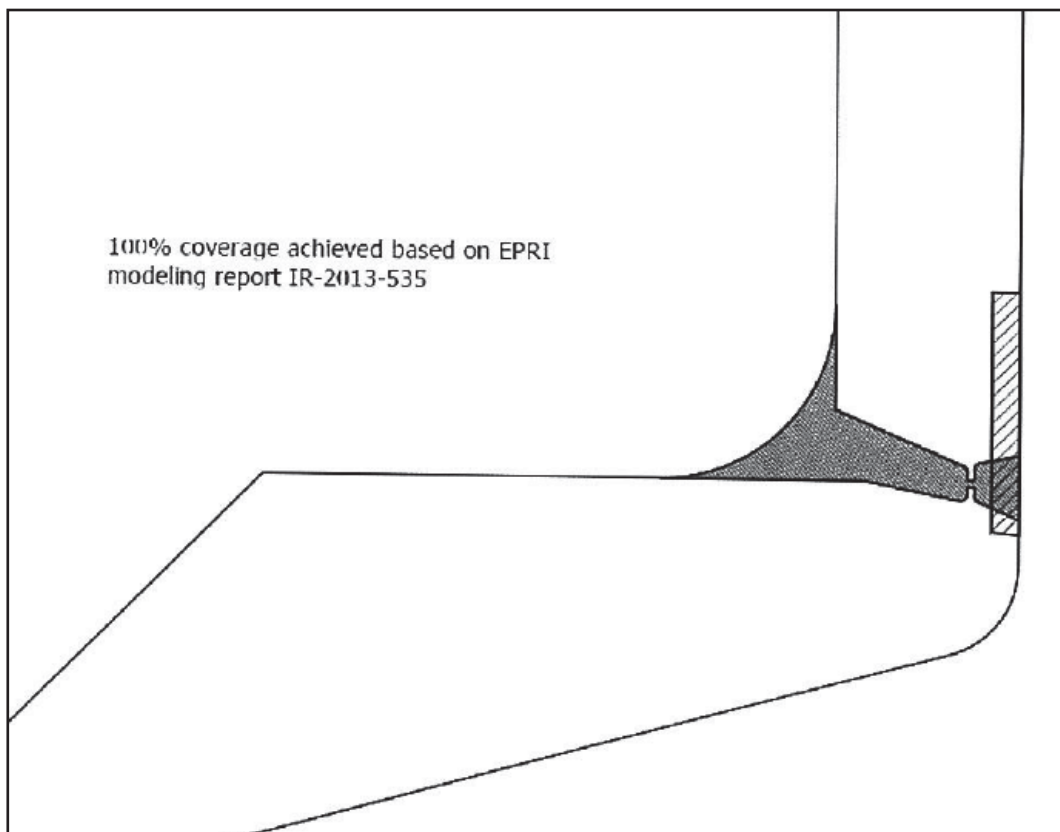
Weld N1A-NV, Lower 15% Coverage
